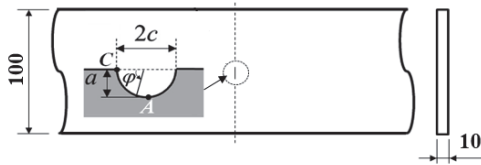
Schematic diagram of a finite plate with electric discharge machining crack
